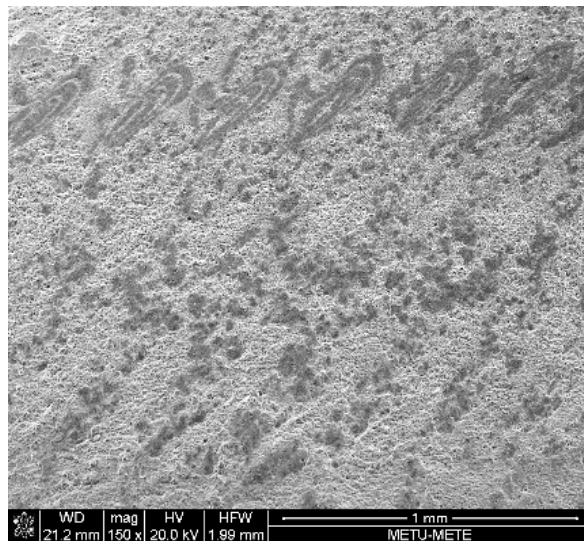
Brittle patterns on the fracture surface of the FSPed weldment (tensile test).
